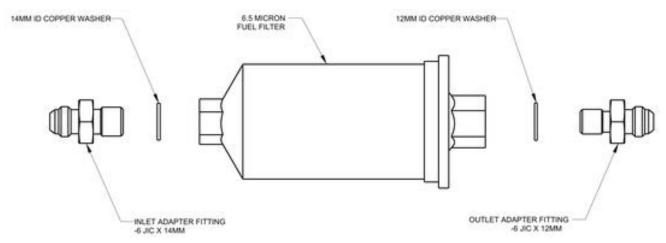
FINE FUEL FILTER EXPLODED VIEW LOOKING AFT
